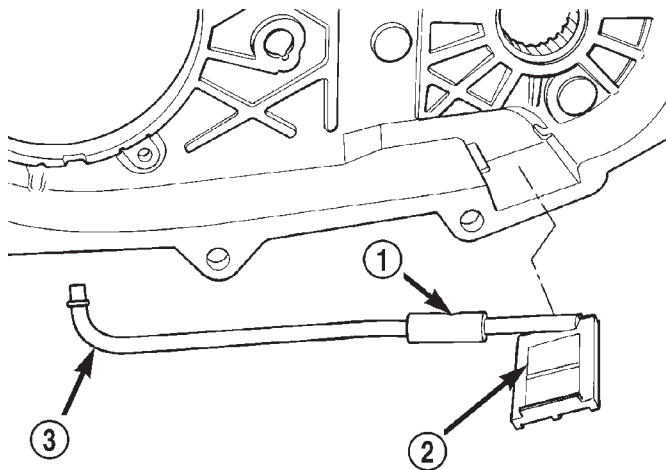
Pickup Tube O-Ring Location1 - OIL PUMP
